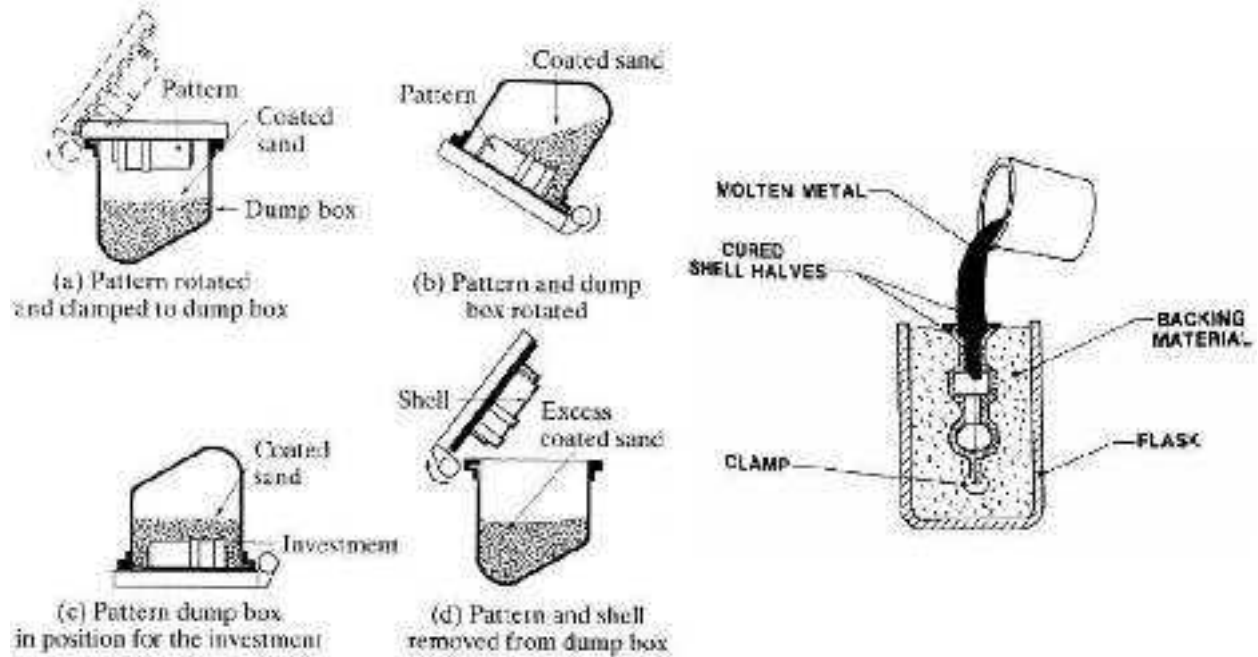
Shell mold casting [Source: Kalpakjian & Schmid]
